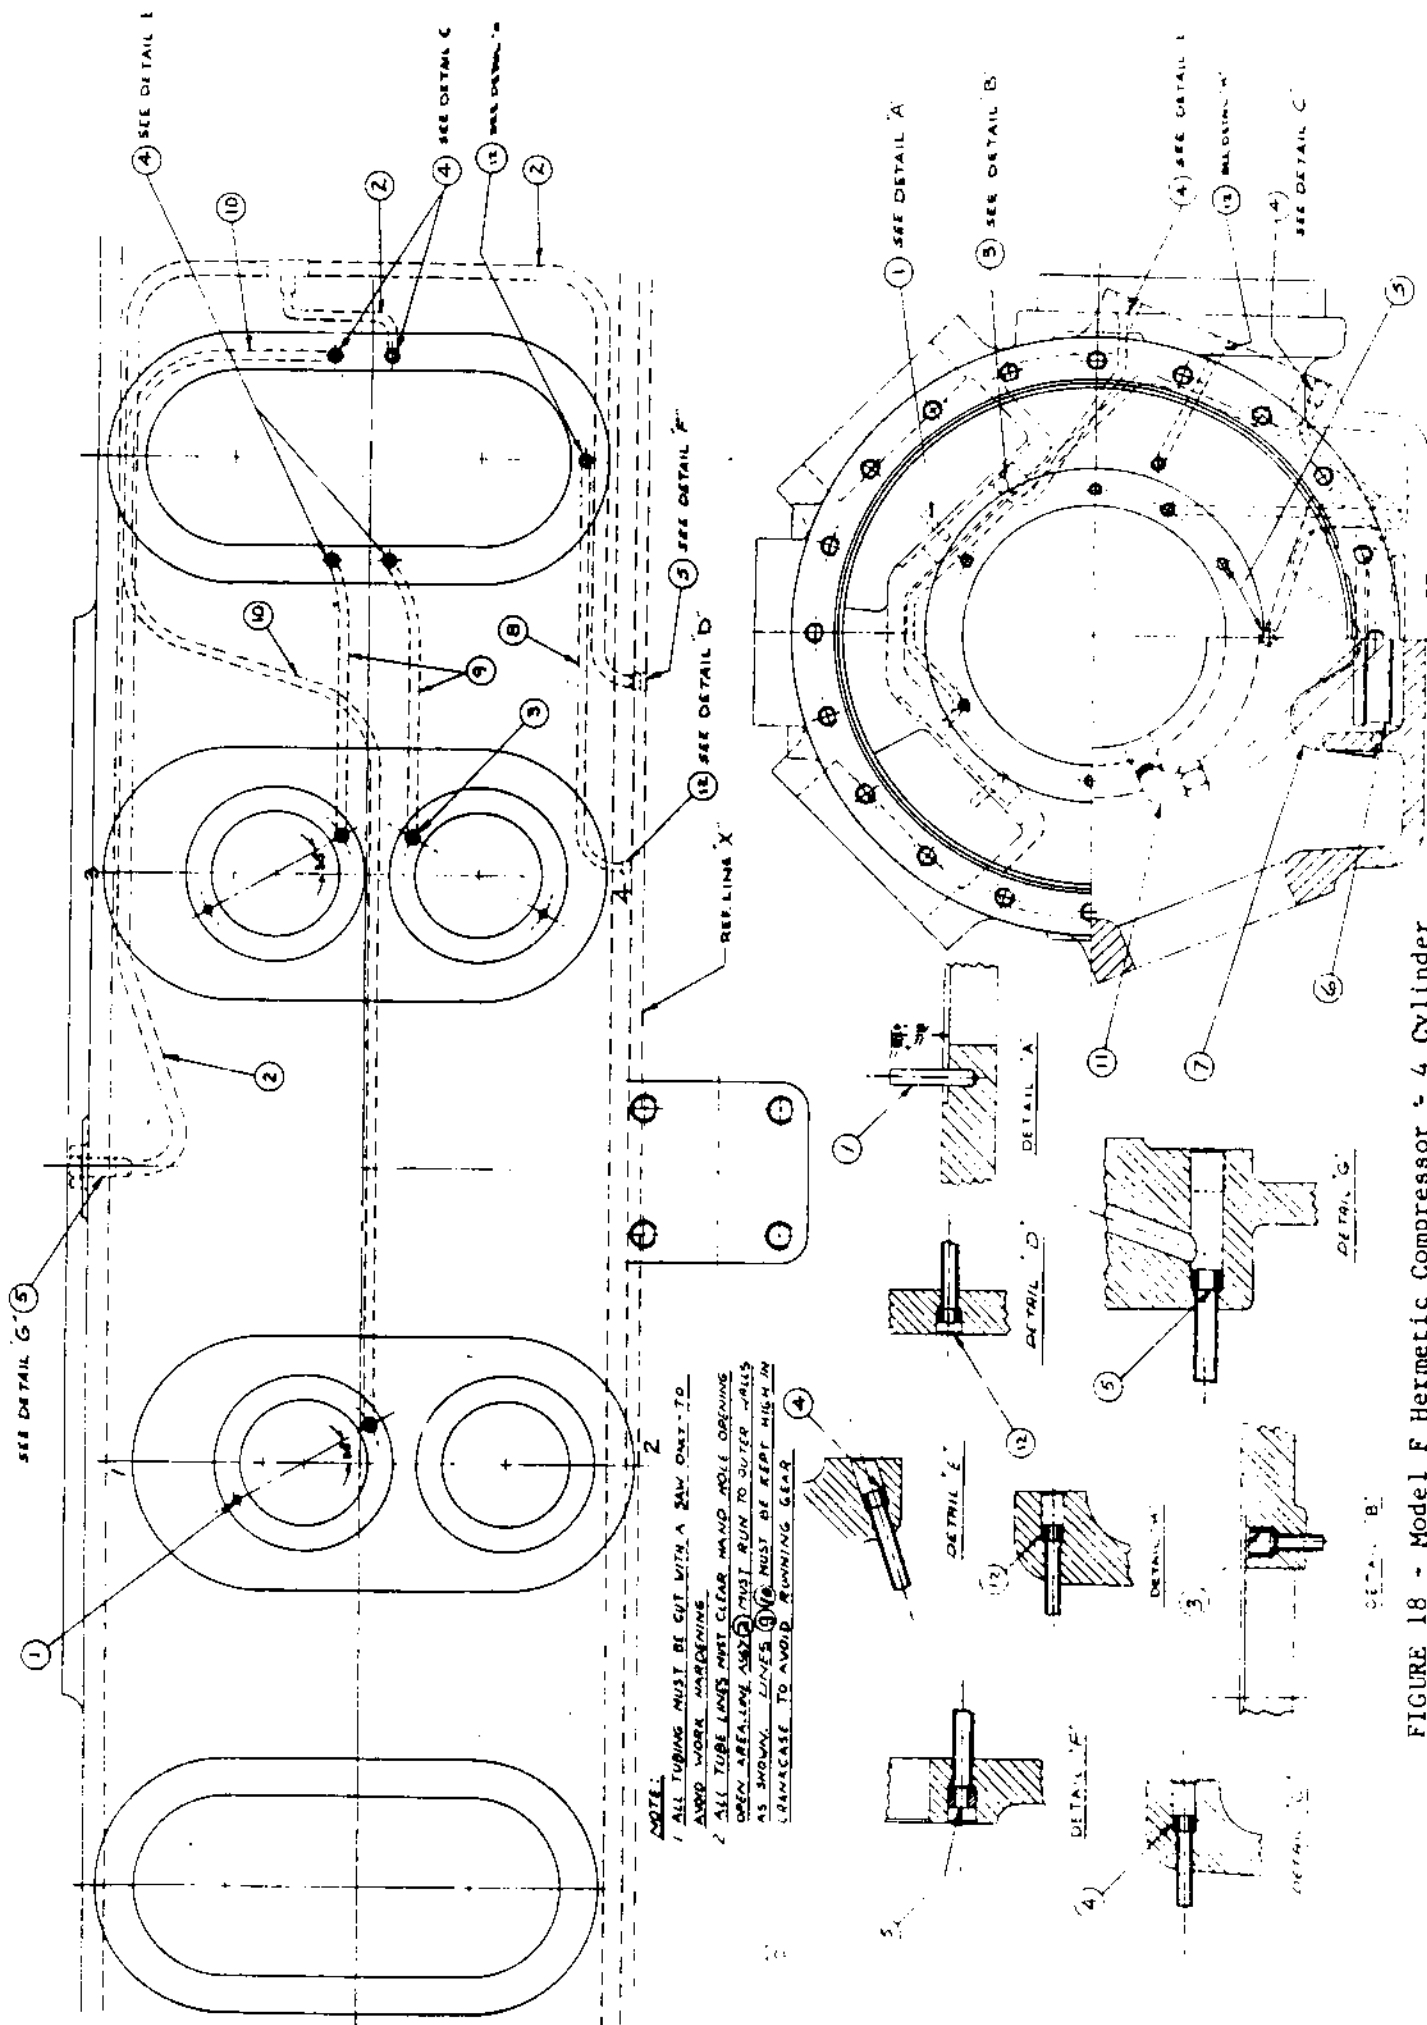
Model F Hermetic Compressor - 4 Cylinder
